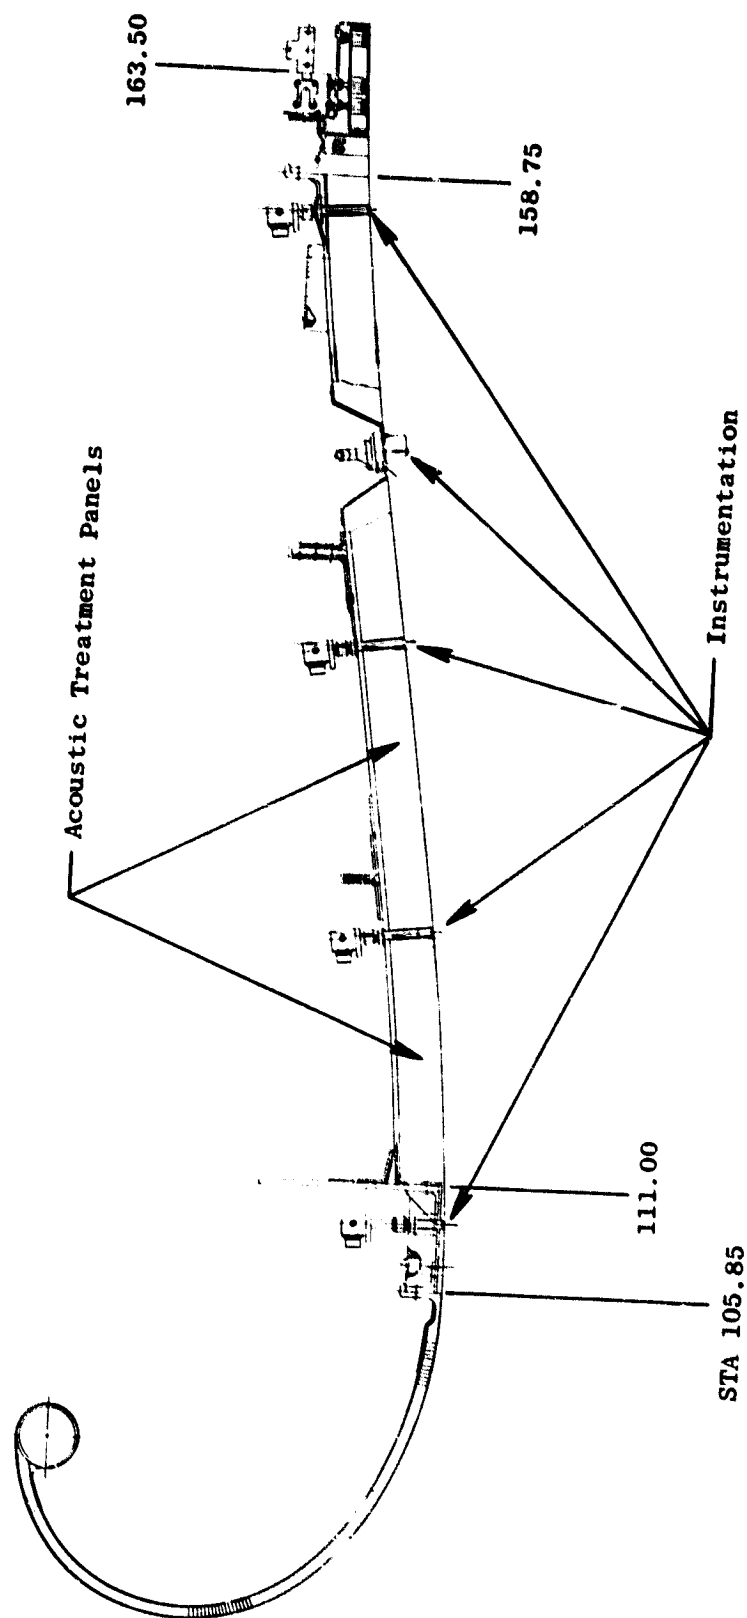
Boiler Plate High Mach Accelerating Inlet.
